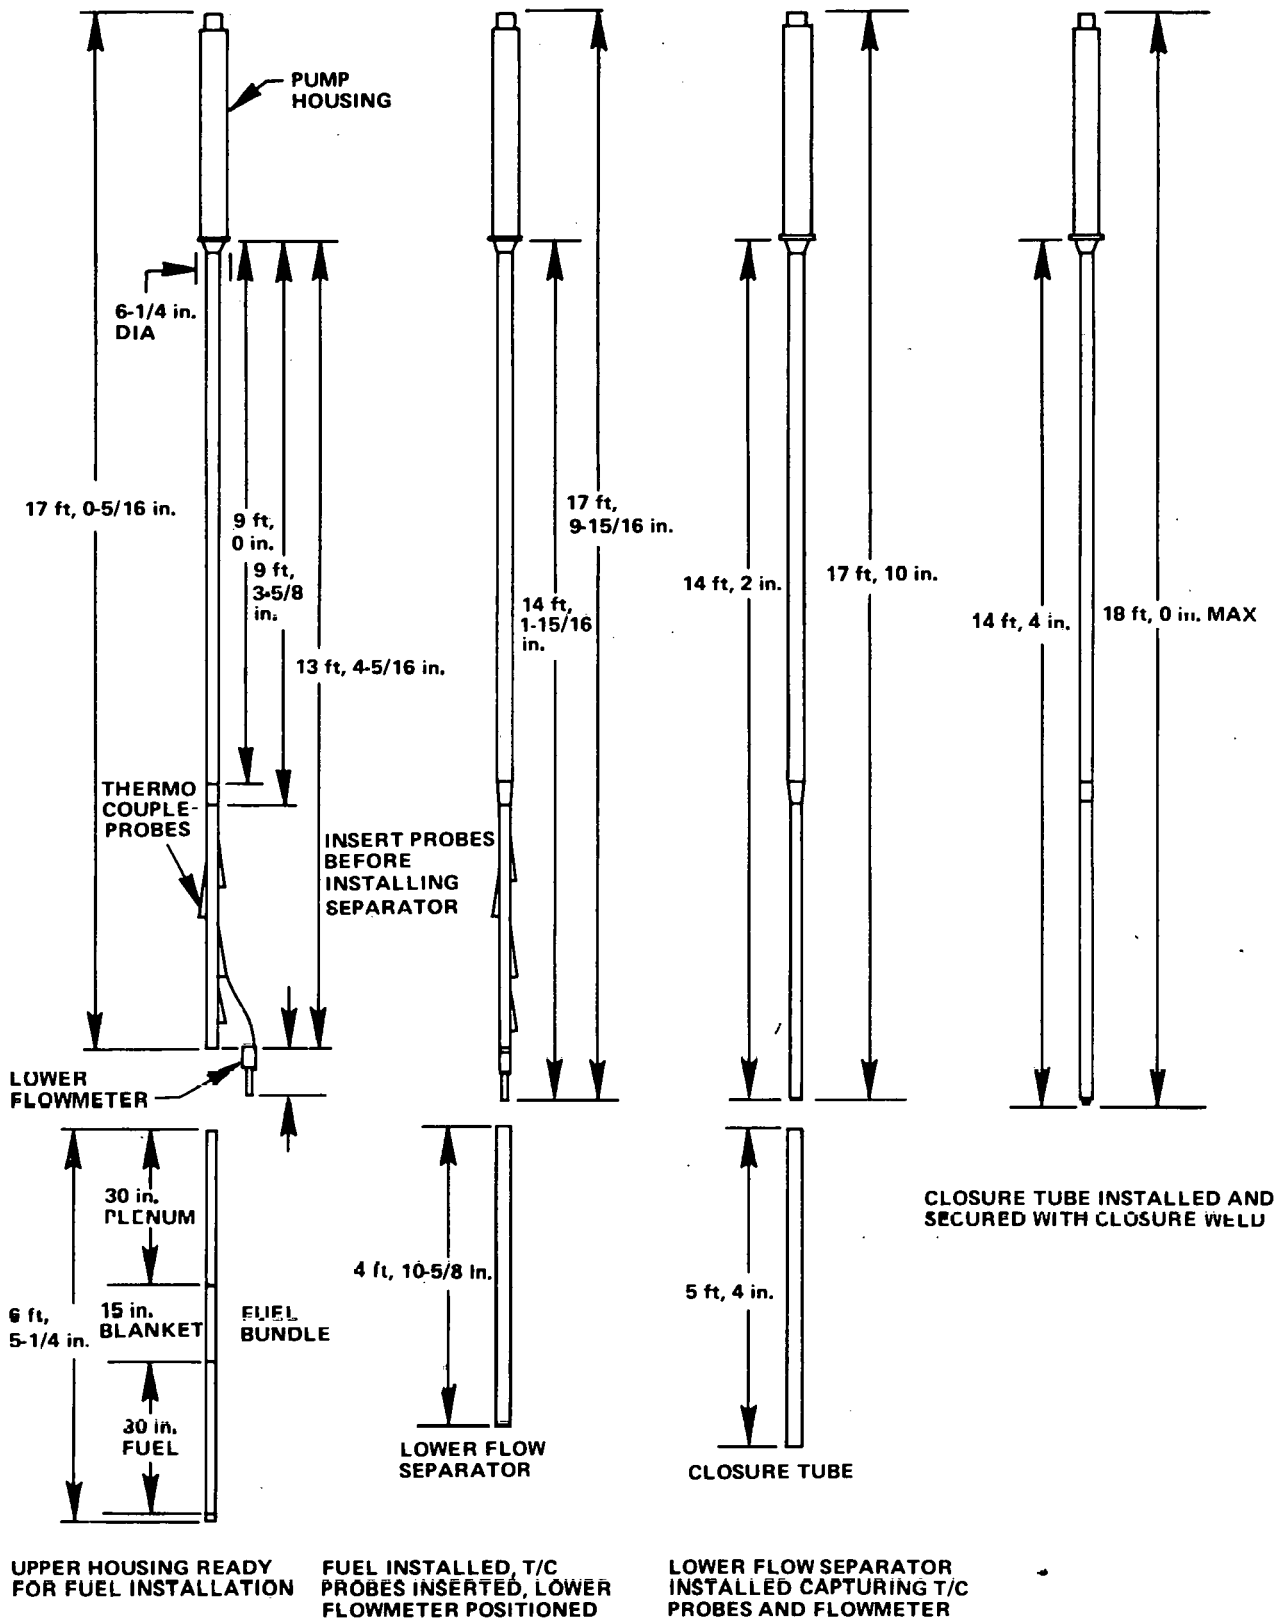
B6-4. Package Loop Assembly Sequence Drawing
